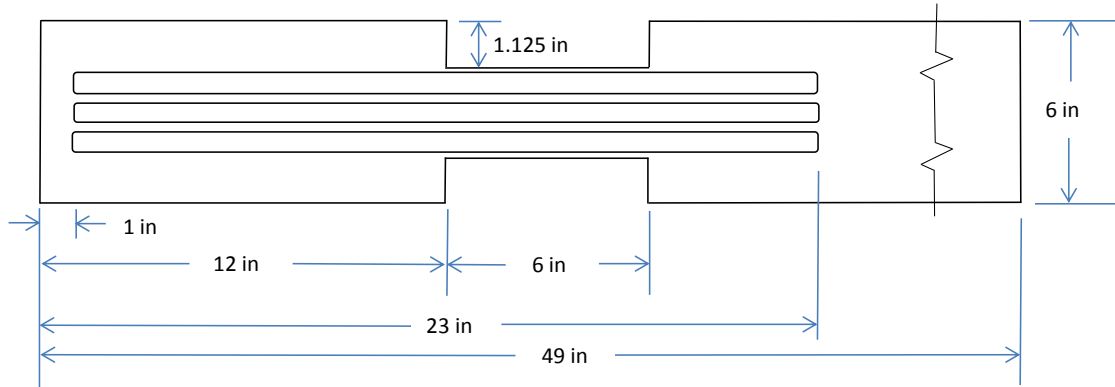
Dimensions for a disturbance weld test plate. Side sections of a plate were cut out to do some disturbance testing.
